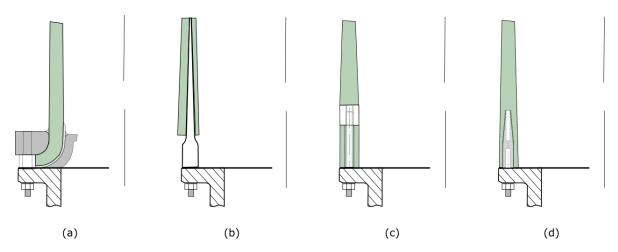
An overview of blade root joints. a) Flange root connection b) Hub type root connection c) T-bolt root connection d) Stud root connection.
